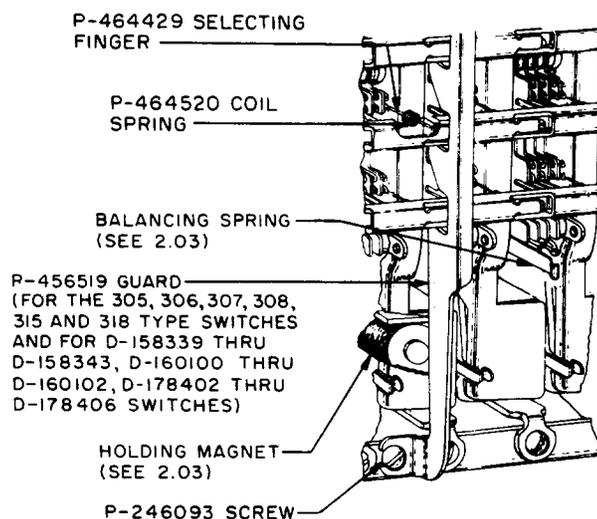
Partial Front View of Switch Showing Guard and Selecting Finger
